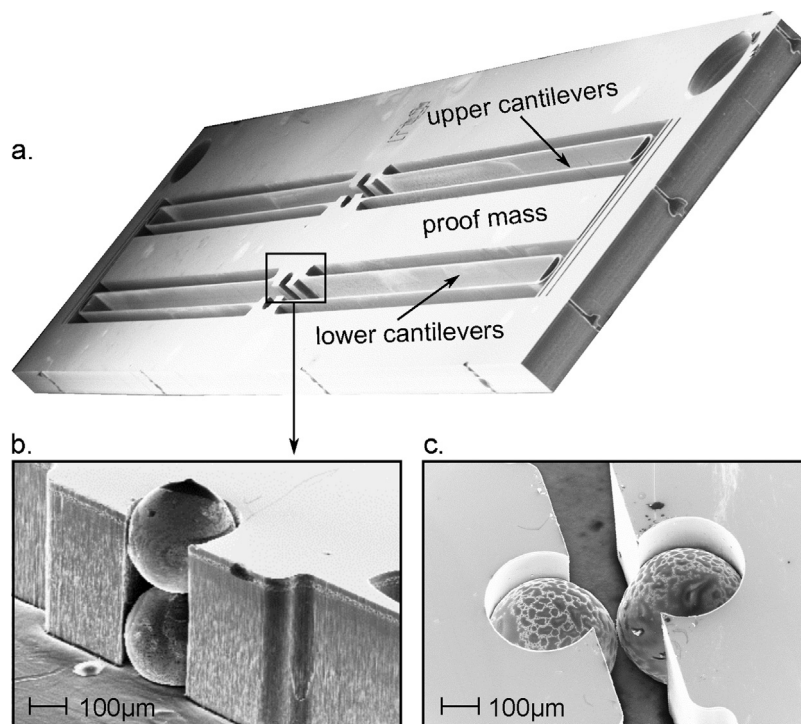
(a) Model suspension system, (b) solder balls before reflow, and (c) solder bumper after reflow.
